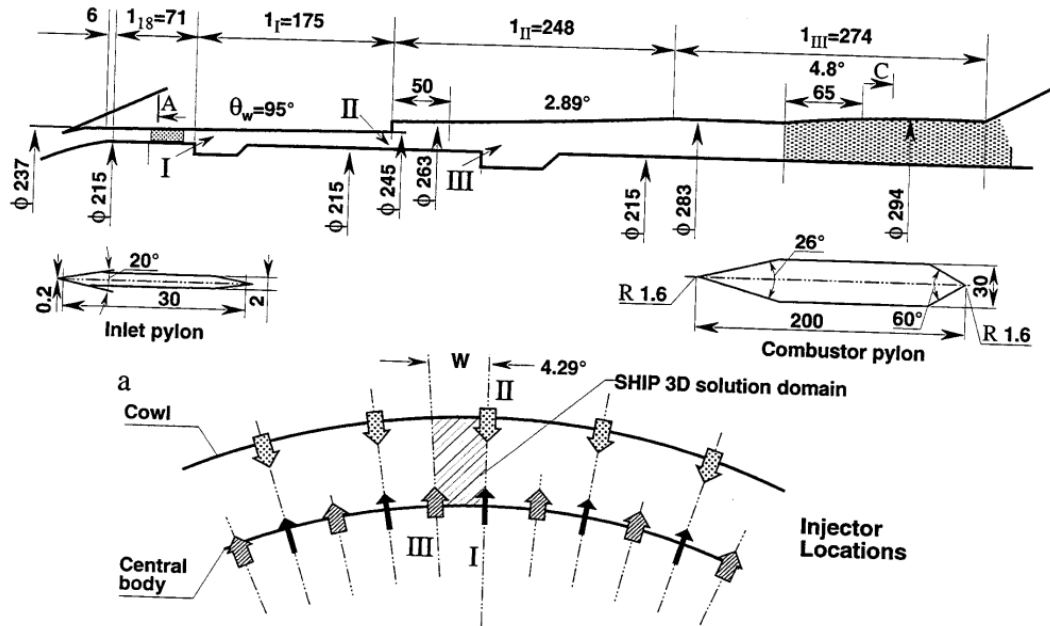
CIAM/NASA scramjet isolator and combustion chamber design [34]
